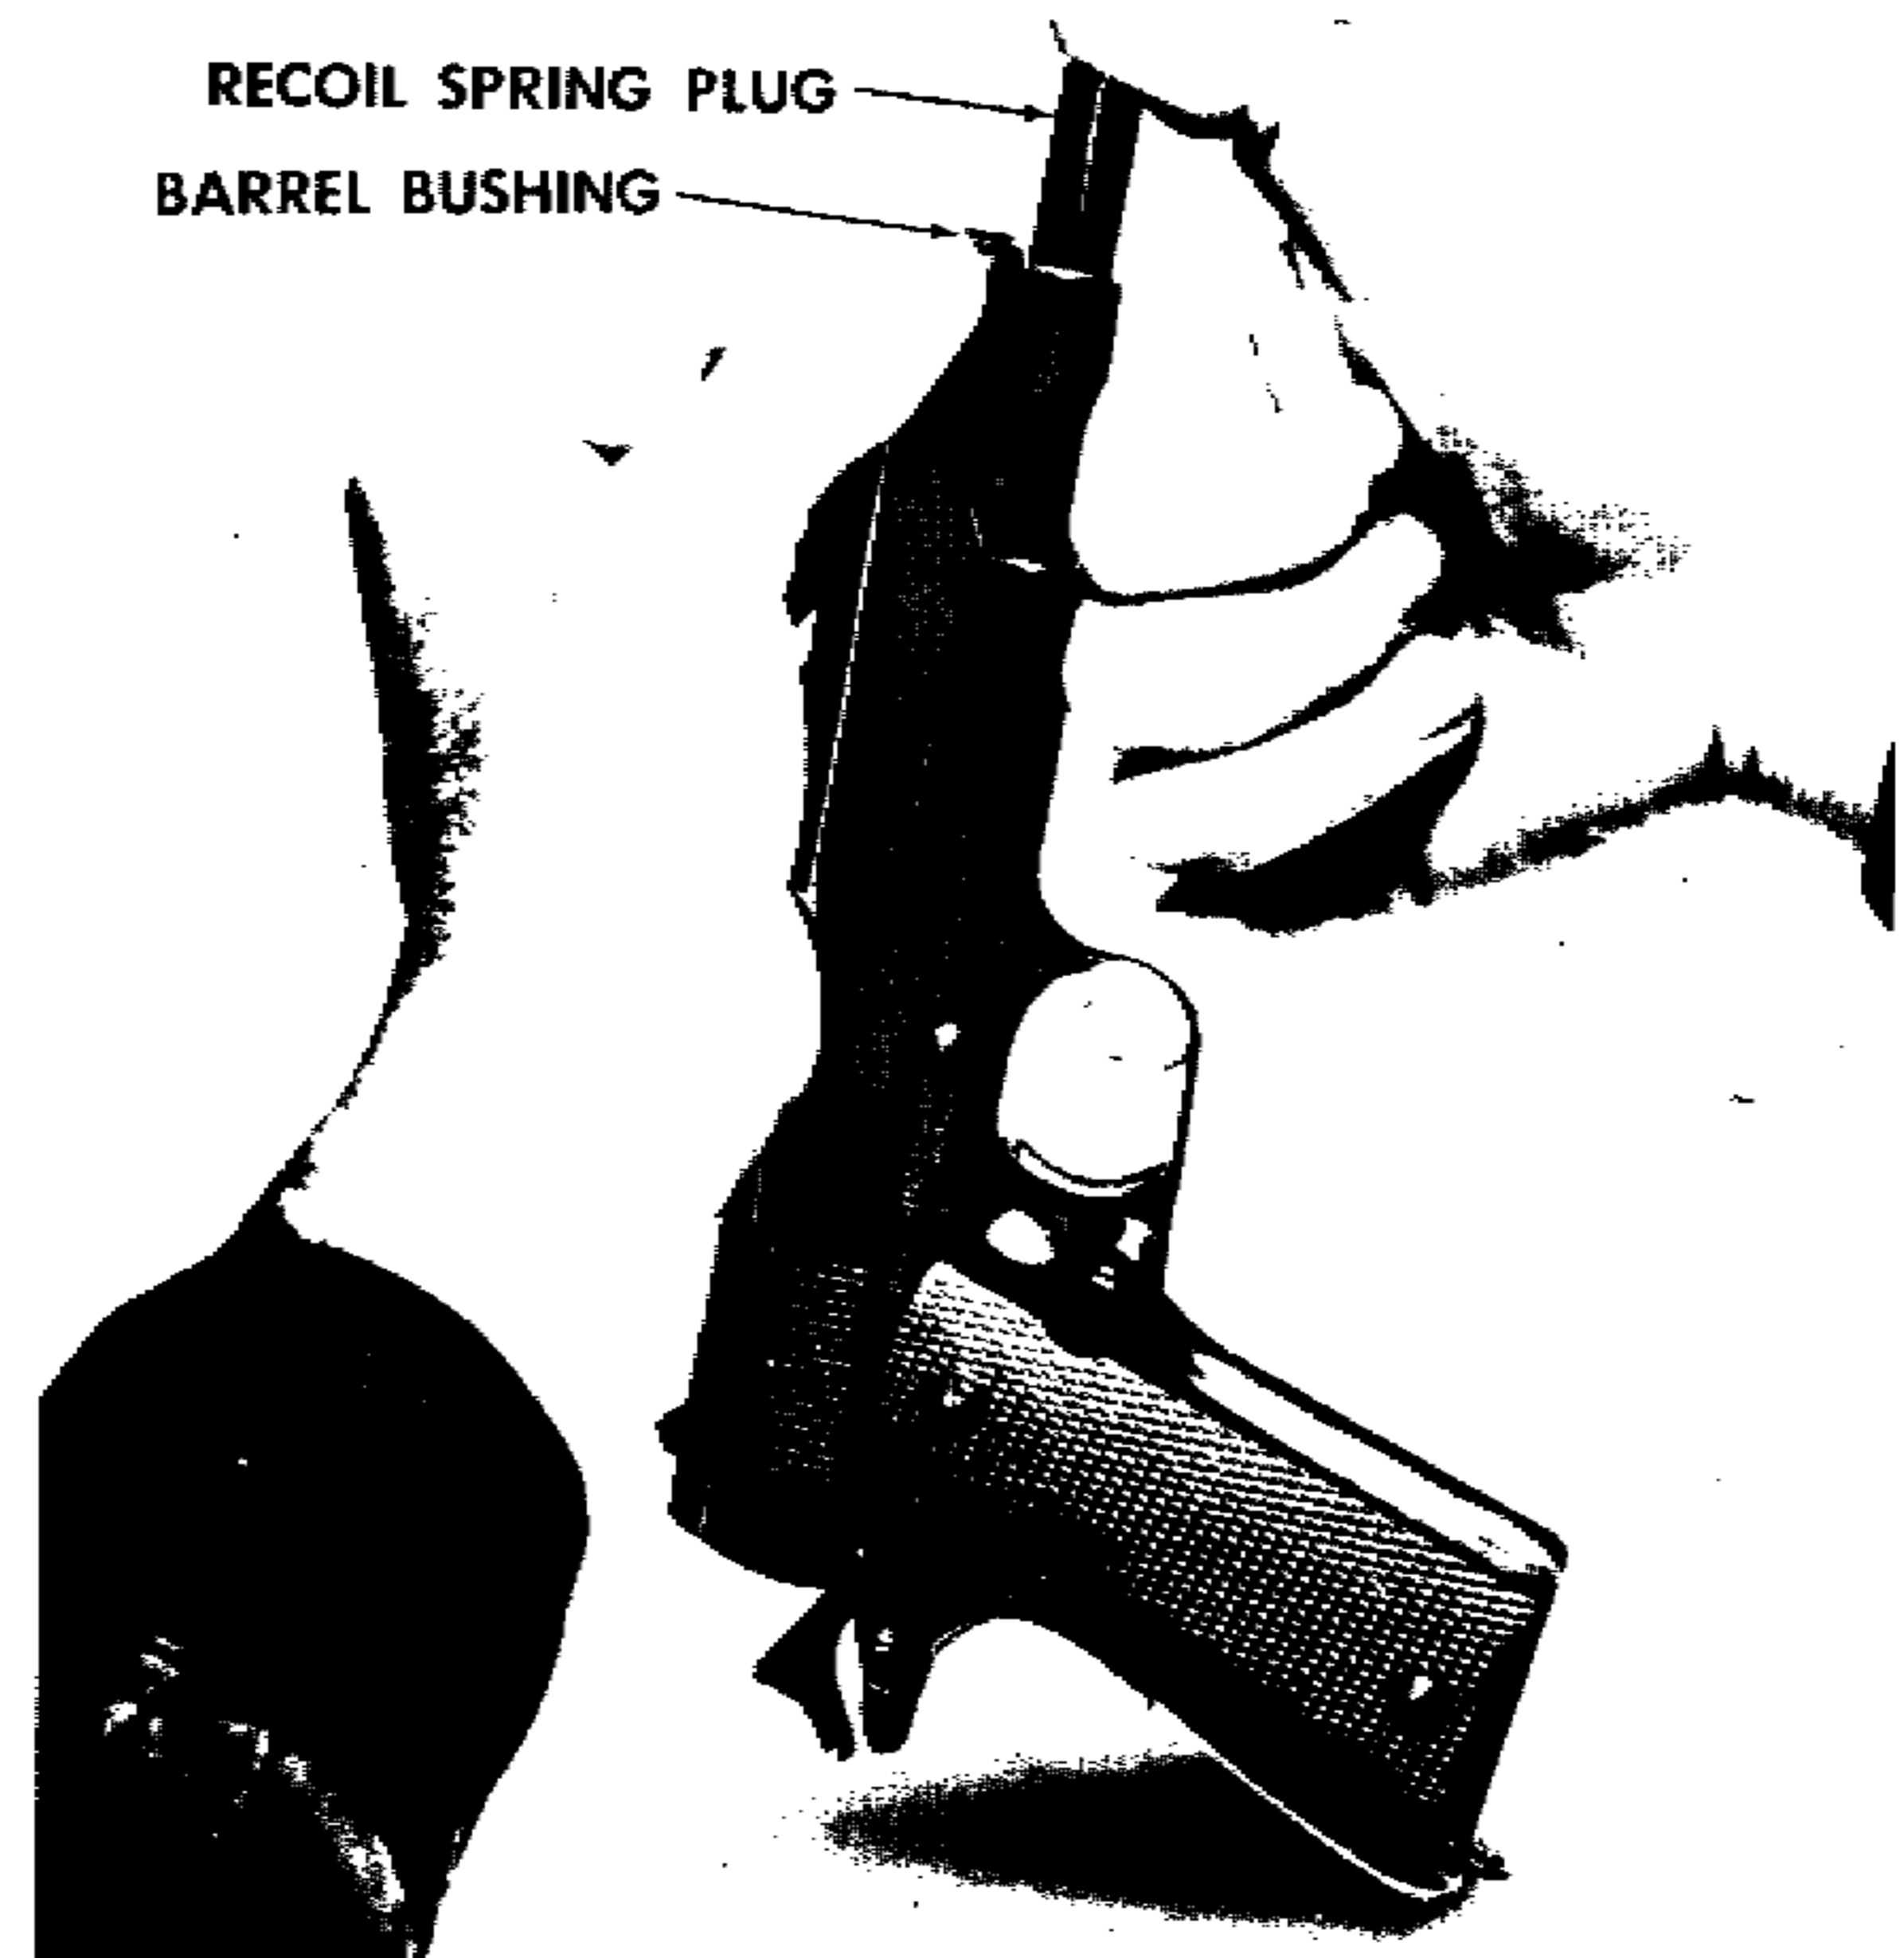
Press down on the recoil spring plug and turn the barrel bushing $\frac{1}{4}$ turn clockwise. Allow the recoil spring to expand slowly, under control, to prevent injury or loss of the part. Turn the recoil spring plug counterclockwise and remove it from the recoil spring.
